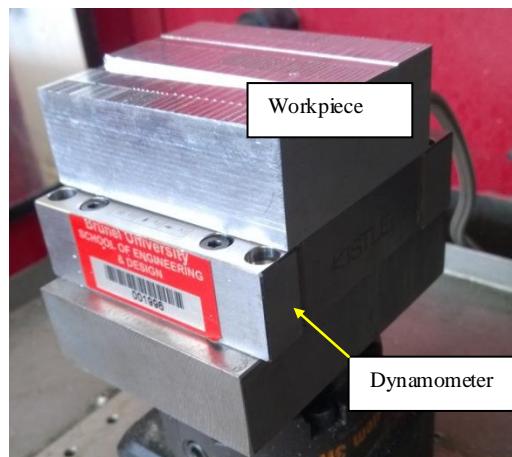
Dynamometer 9256C2 with a workpiece sitting on the top
